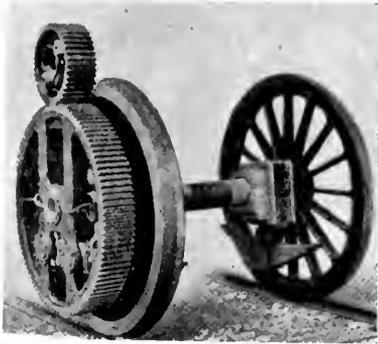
Swiss Federal Railways. Outside geared drive showing location of gear and pinion with respect to the driving wheels
